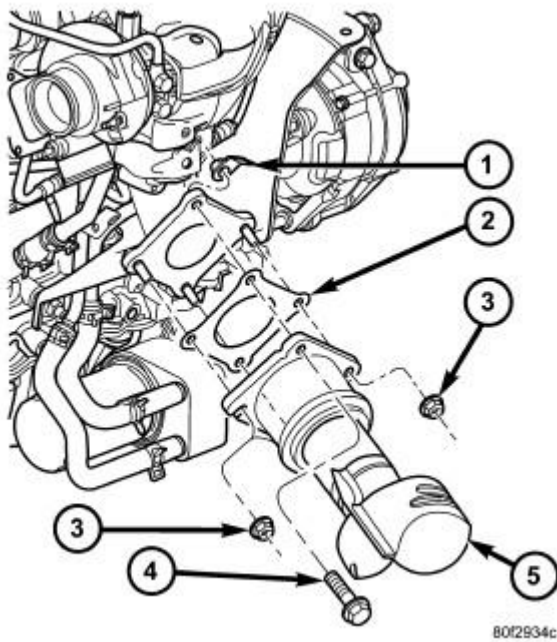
Converter to Exhaust Manifold Connection - 2.4L Turbo
